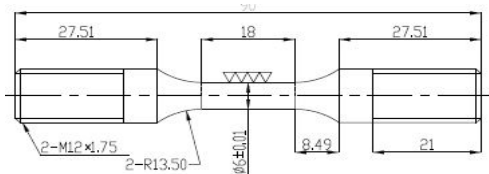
Geometry of the cylindrical weldment specimen (All dimensions in mm)
